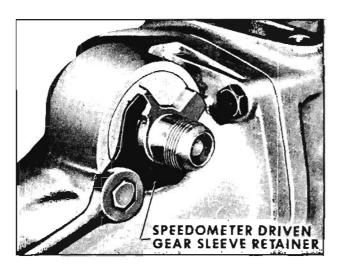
Removing Speedometer Driven Gear Retainer
